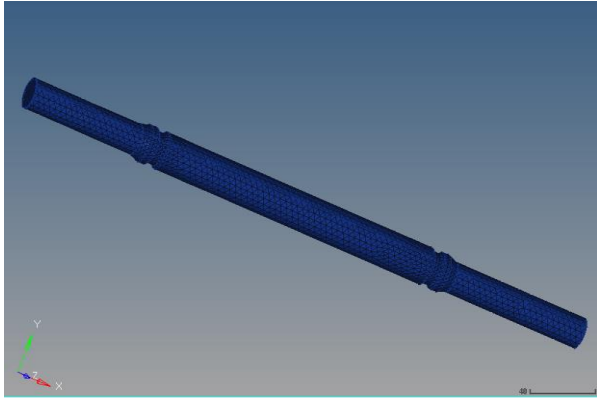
CAD Model of front axle drive shaft of Alto800 car
